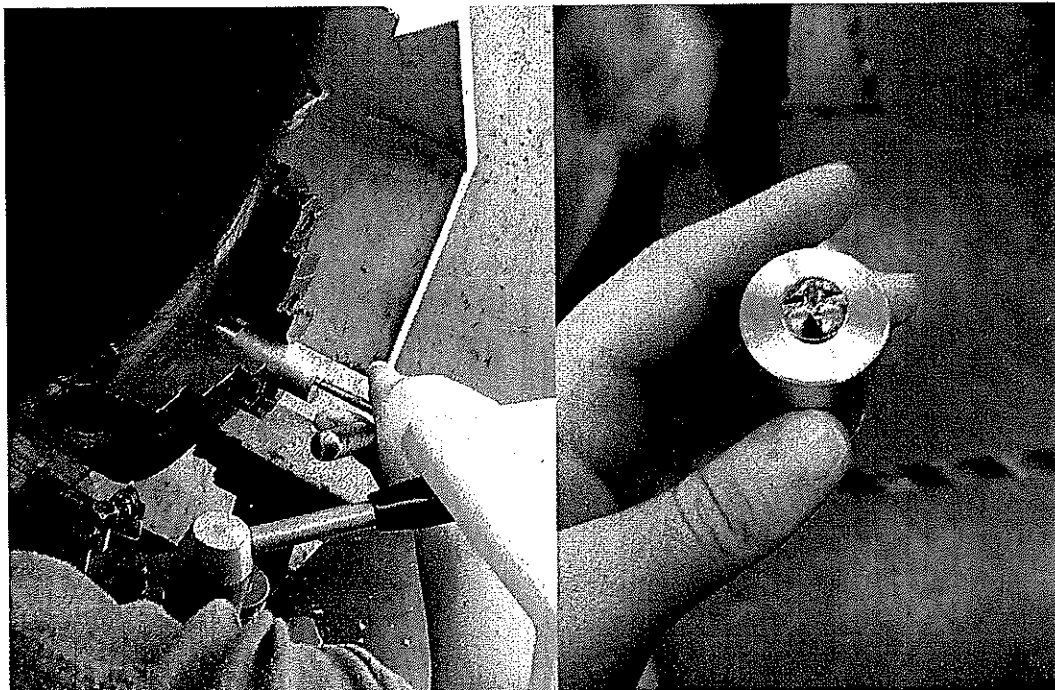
The right picture shows the use of the $\varnothing 1/4'' - 20$ Thd. tap kit. The left side shows a $\varnothing 1/4''$ round head bolt used to test the hole after tapering was complete.
